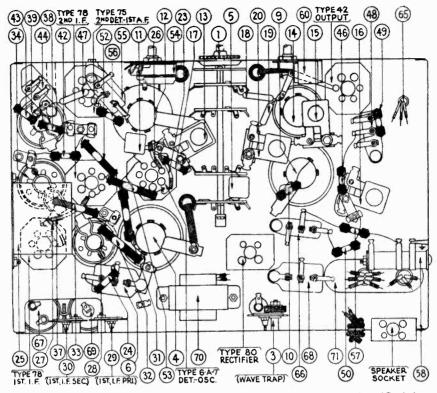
Bottom View of Chassis, Showing Parts, and Position of Compensating Condensers Located, from Below Chassis
